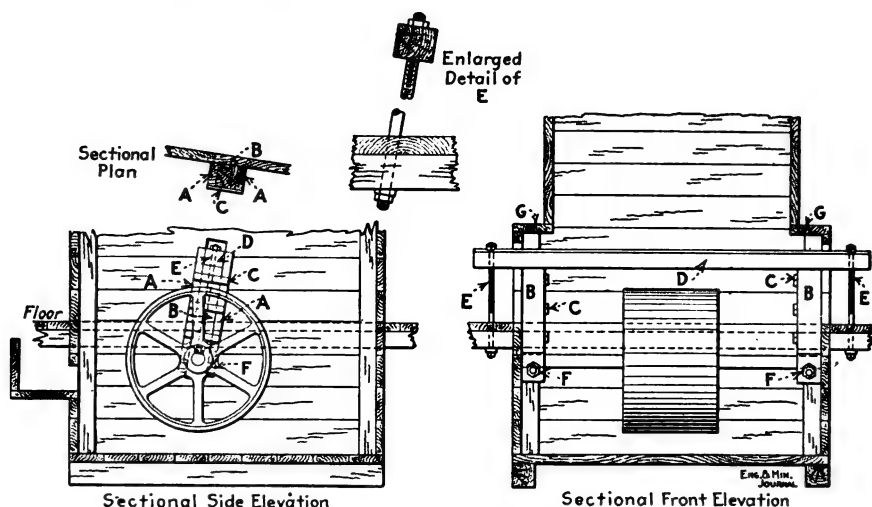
SCREW TAKE-UP DEVICE FOR LOWER ELEVATOR-PULLEY.
